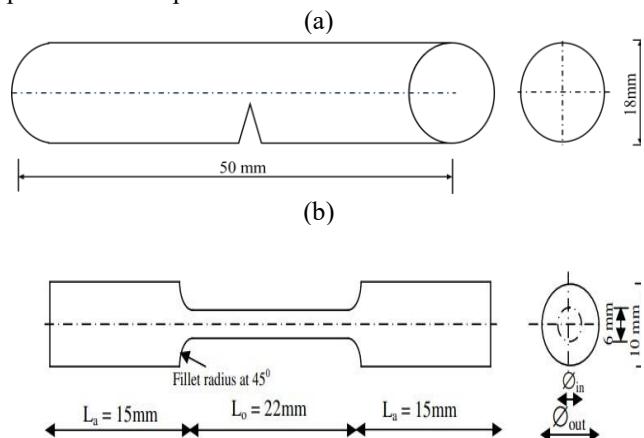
Standard specimen geometries used in mechanical testing: (a) Izod impact test specimen ($\varnothing 18 \text{ mm} \times 50 \text{ mm}$) with V-notch (2 mm depth, 45° angle, 0.25 mm root radius)
